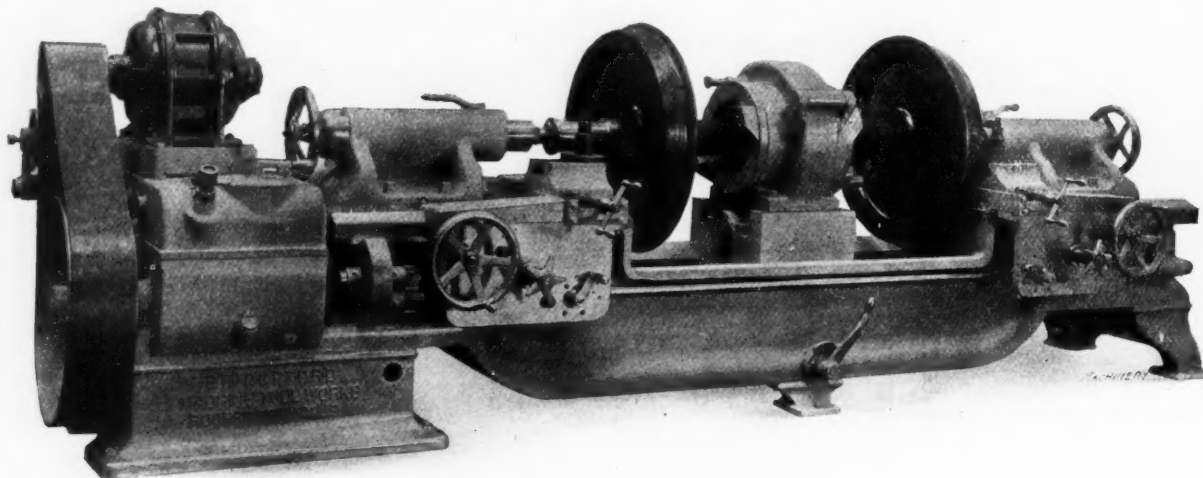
Bridgeford Axle Lathe equipped with two Carriages
